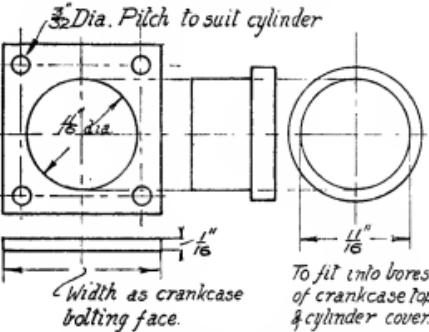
Template for drilling the cylinder fixing-holes in the crankcase, cylinder flange, and the cylinder cover
